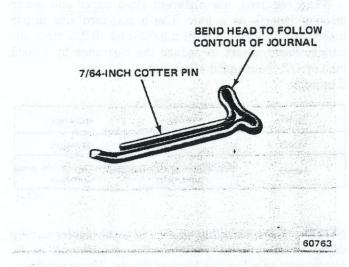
B-147 Fabricated Upper Main Bearing Insert Removal Tool
